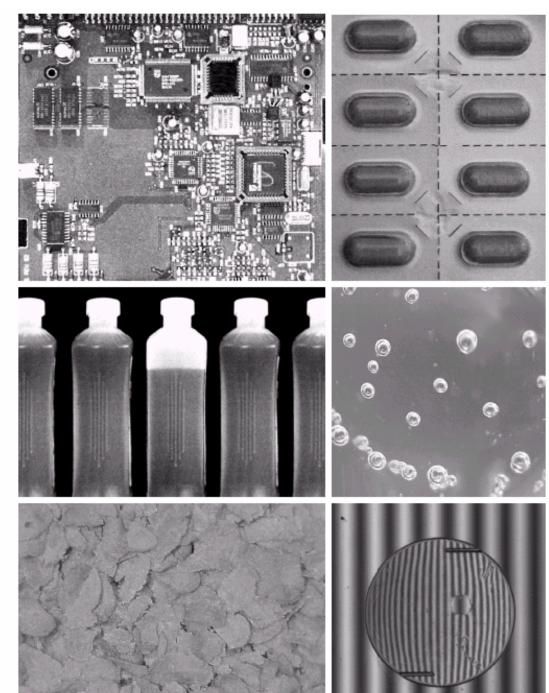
Some examples of manufactured goods often checked using digital image processing. (a) A circuit board controller. (b) Packaged pills.(c) Bottles. (d) Bubbles in clear-plastic product. (e) Cereal. (f) Image of intraocular implant. (Fig. (f) courtesy of Mr. Pete Sites, Perceptics Corporation.)
